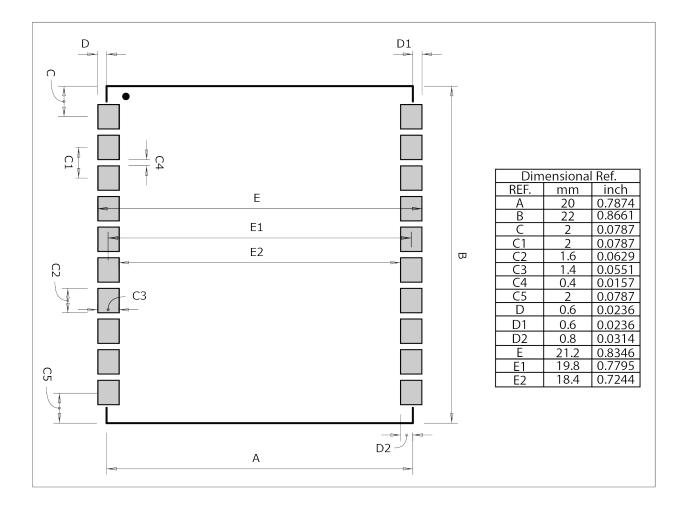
Recommended PCB layout for SM5211-SMD module (SMD20 package)
